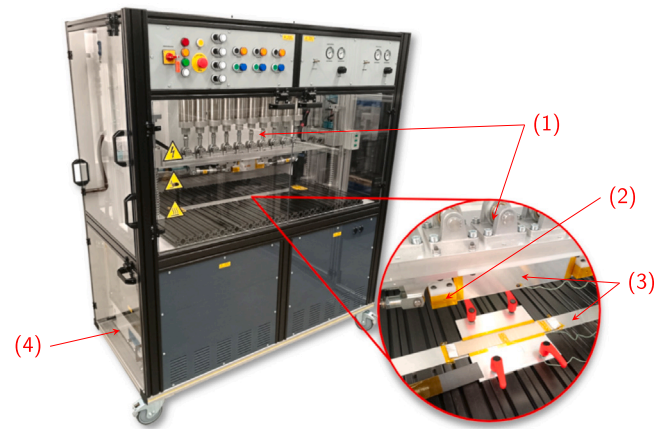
Custom-made resistance welding rig at the University of Bath. Arrows indicate the key components; (1) the pneumatic press, (2) the clamp connectors, (3) the press heads/heatsinks and (4) the DC power supply unit.
